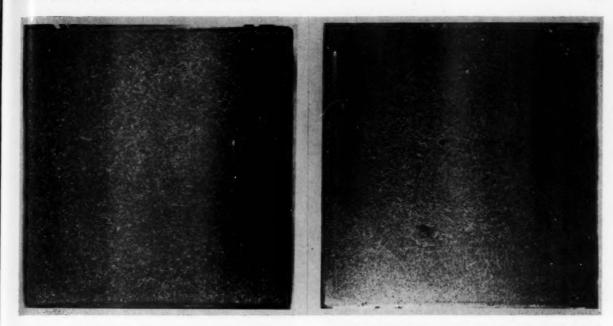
Representative macrostructures of sand castings. (Left) P. T. 2725 F. (Right) P. T. 2800 to 2900 F. Photo reduced about 22% in reproduction.
